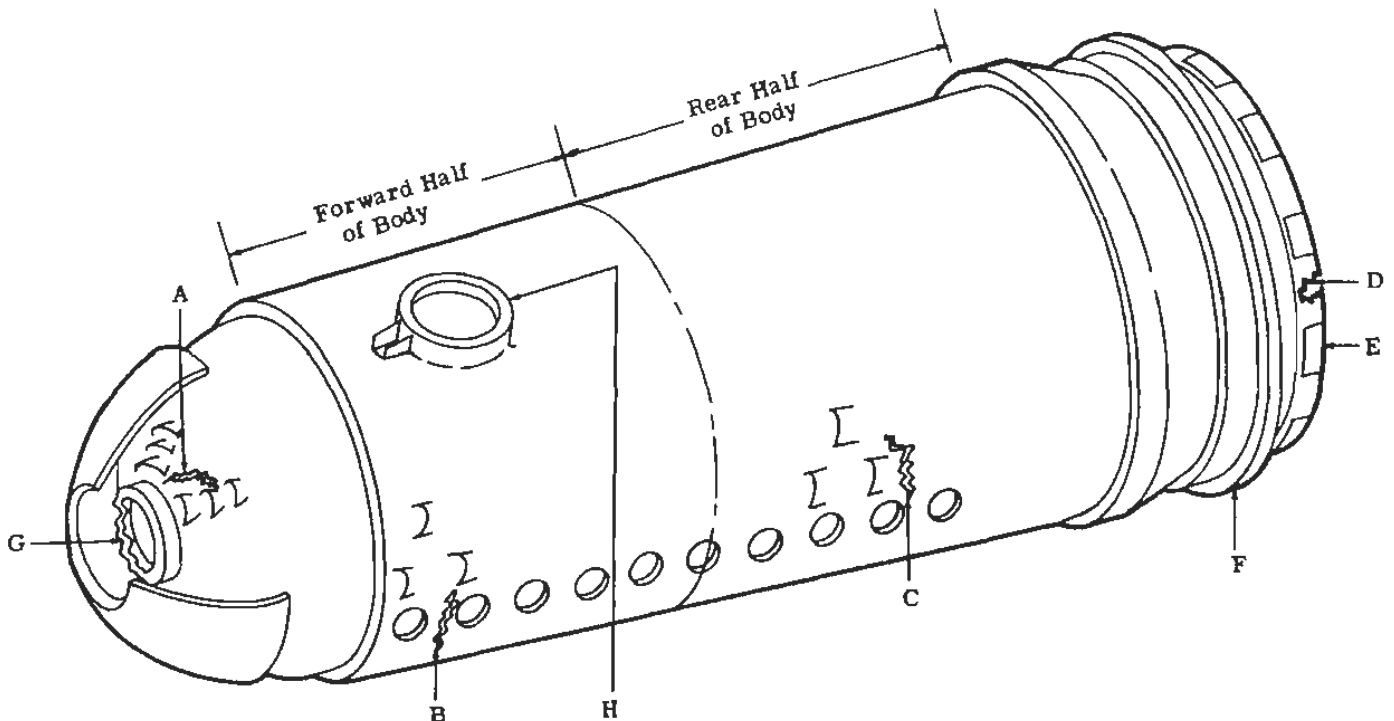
Inspection Limits for Inner Combustion Chambers
